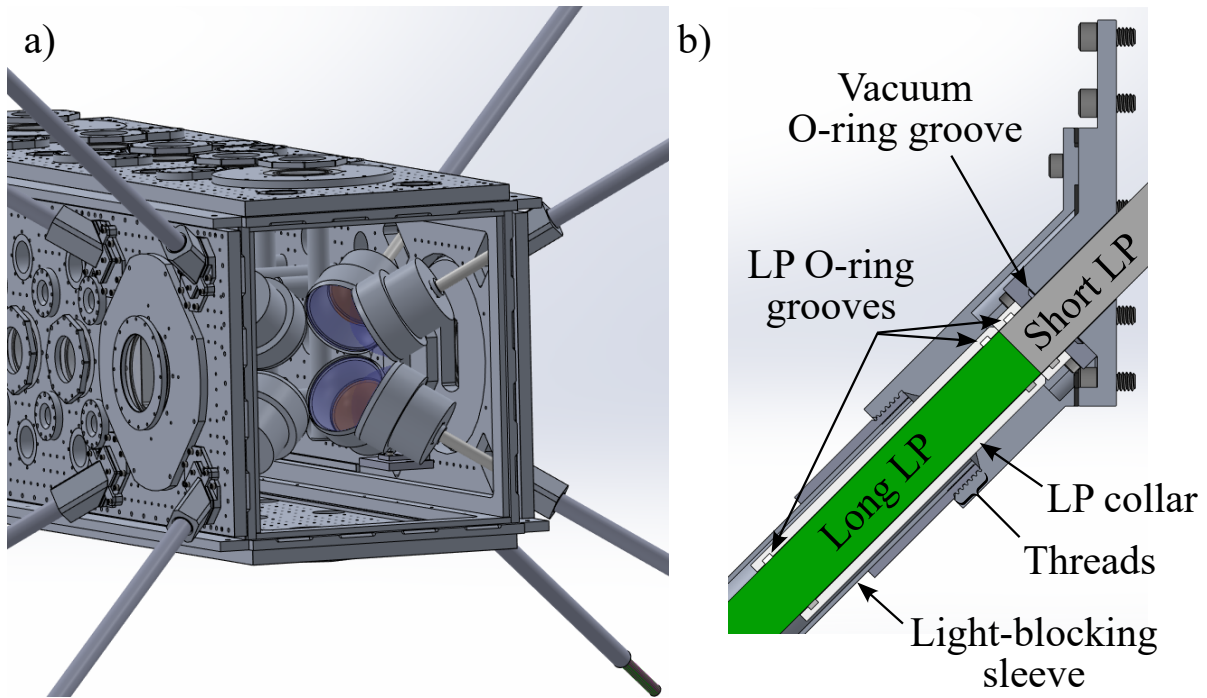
Lightpipe angled flange. a) View of vacuum chamber with collection optics lens doublets, LPs, and angled LP flange. The field plates and a vacuum flange have been removed for clarity. b) Cross-section of LP angled flange (designed by Cole Meisenhelder), where the short and long LPs connect. The long LP is held in place by friction from the LP collar. A sleeve with external threads is installed to the flange for light-blocking.
